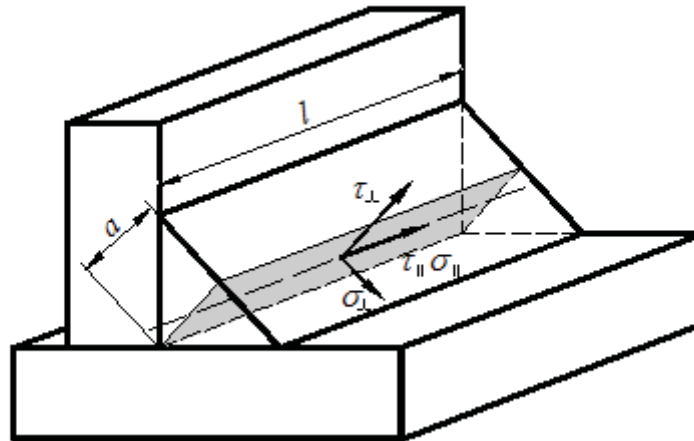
Level of stress in fillet weld: a – calculation thickness of weld, l – length of weld [3]
